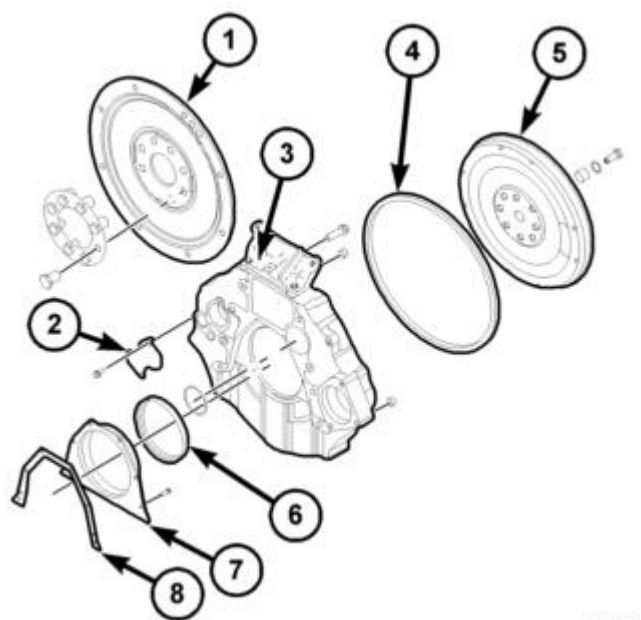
FLYWHEEL AND ADAPTER PLATE
